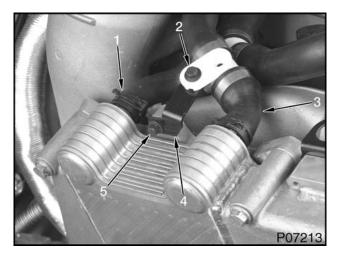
Low Pressure Charge Air Cooler (LPCAC) coolant pipe connections
